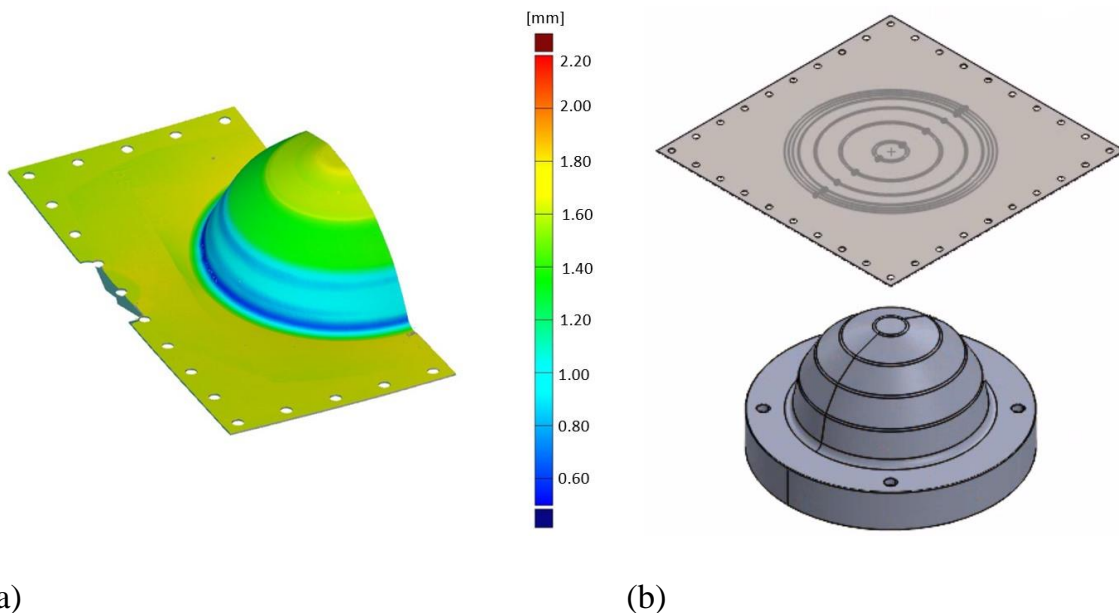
Design of LMD added thickness: (a) 3dimensional representation of ISF formed part; (b) Informing thickening area using die projection.
